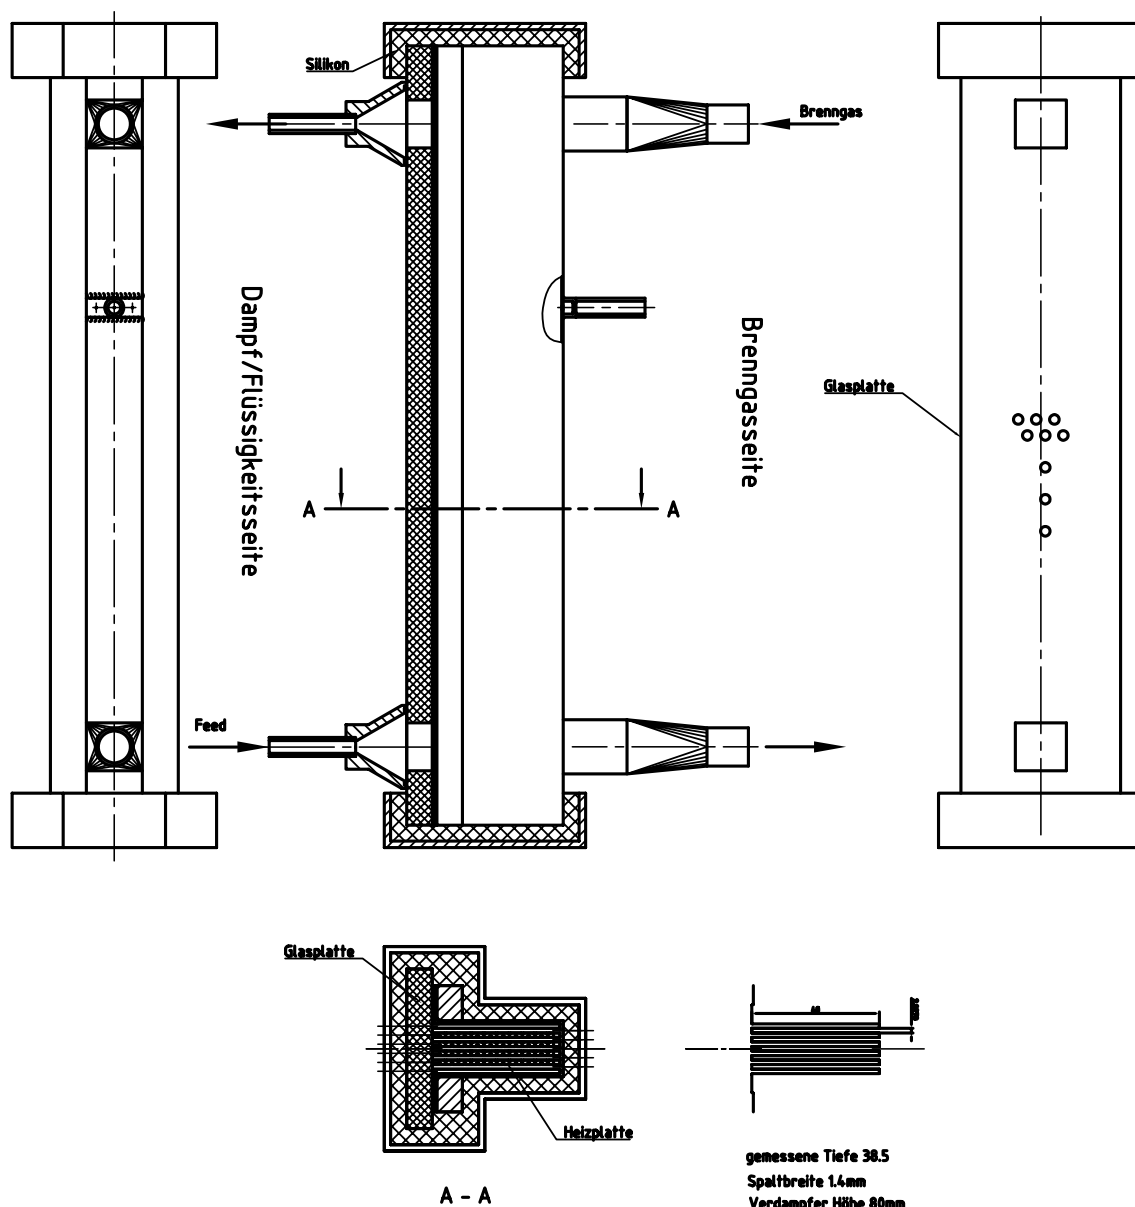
Design drawings and details on the catalytic countercurrent folded-sheet “Glass-Plate” evaporator. Upper drawings (from left to right): rear, side, and front view of the evaporator unit. Note that the figure corresponding to the back view of the evaporator unit shows the connectors of feed and off-gas on the combustion side. The front view of the evaporator shows the glass plate and its respective connectors. The combustion gas side feed port can be better recognized from the side view (intermediate connector). Lower drawings: top view of the evaporator unit, and top view of the folded-sheet core structure.
